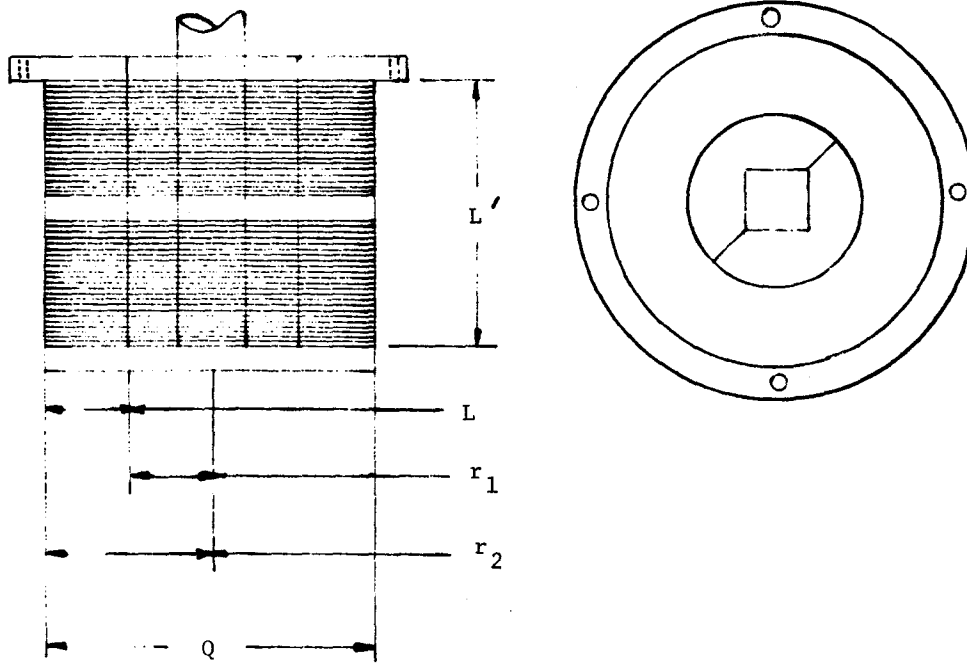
CONVECTION COOLER SUBASSEMBLY
